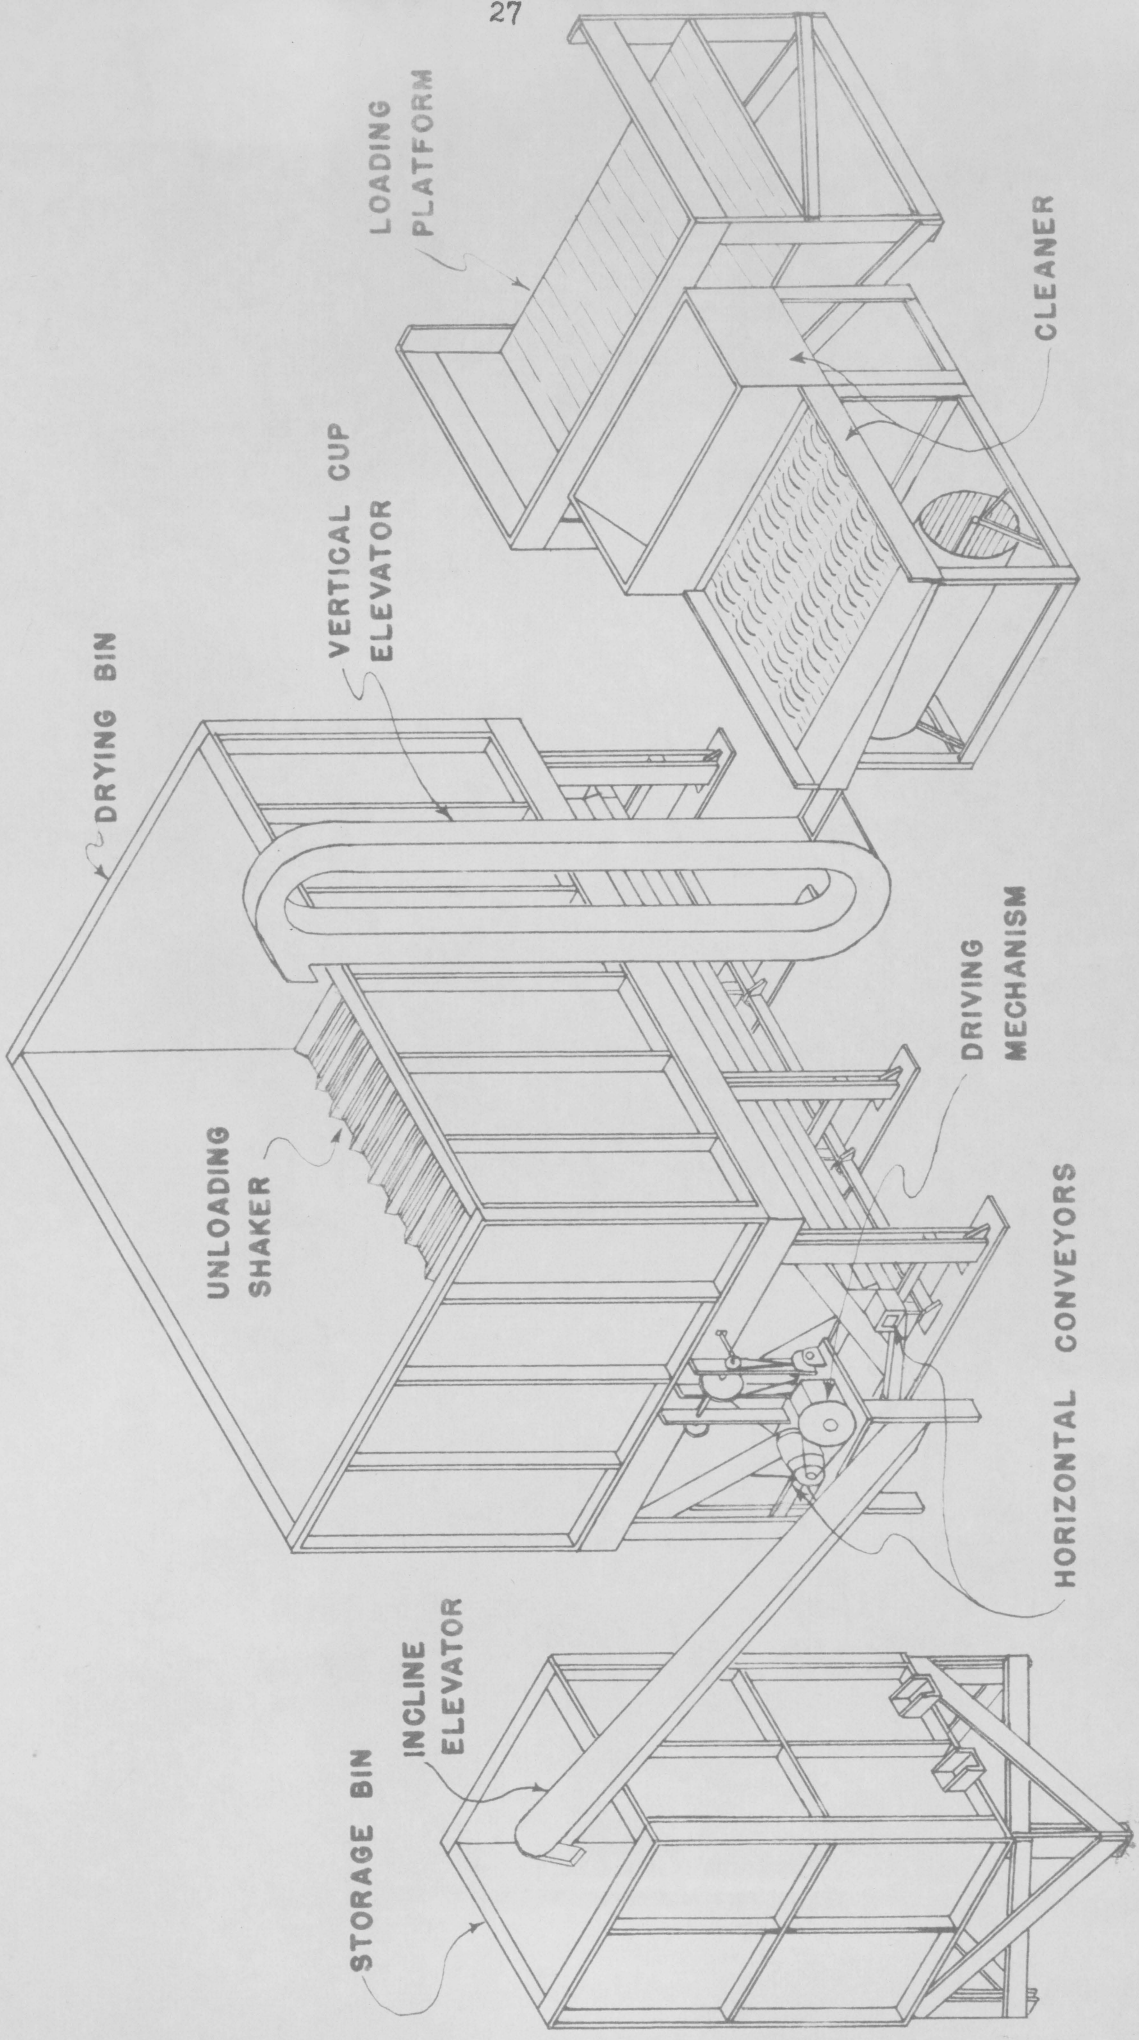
General isometric sketch of continuous drier, elevator, elevators and storage bin.
